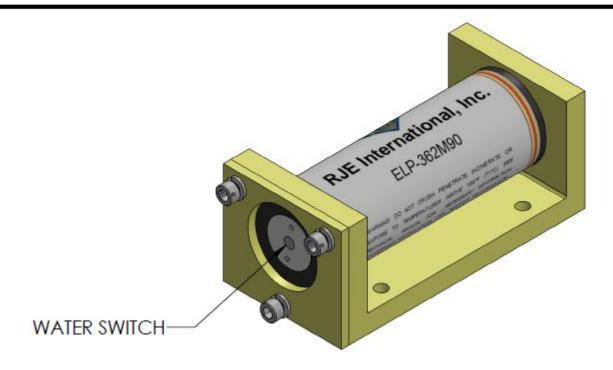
ELP-362M90 Installed in Mounting Bracket
